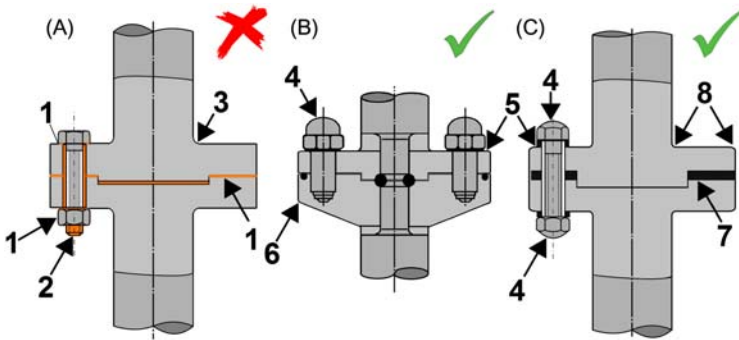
(A) Bolted agitator couplings with flat hexagon head screws without elastomer gasket under the bolt head and the nut give rise to metal-to-metal crevices (1) that may allow the ingress of food product and bacteria. Moreover, debris may lodge in and around the bolt thread (2). The absence of a circumferential O-ring or flat gasket gives rise to another metal-to-metal crevice, and product and microorganisms may be retained in the cavity (3). (B, C) Agitator couplings made by means of domed hexagon bolt heads and nuts (4) provided with an elastomer gasket (5) under the bolt head and the nut allow for a crevice free joint without metal-to-metal contact. Due to the presence of a circumferential O-ring (6) or flat gasket (7), no product and microorganisms can enter inside the agitator coupling. Corners are radiused (8). However, there is still a horizontal flat surface at the upper side of the agitator coupling where debris may lodge (Hauser et al., 2004b; ASME BPE committee, 2014; Moerman and Kastelein, 2014).
